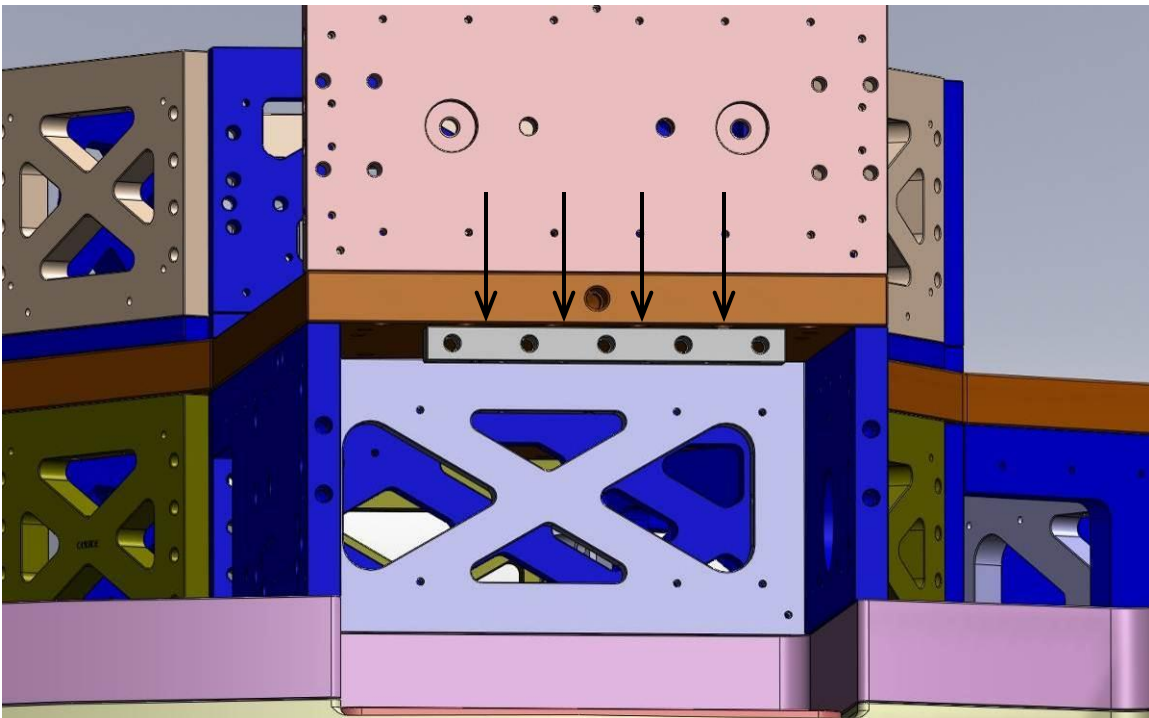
D0901536 Bracket, Lower Outer Wall, Top Installation on D0901520 Stage 2 Mid Plate
